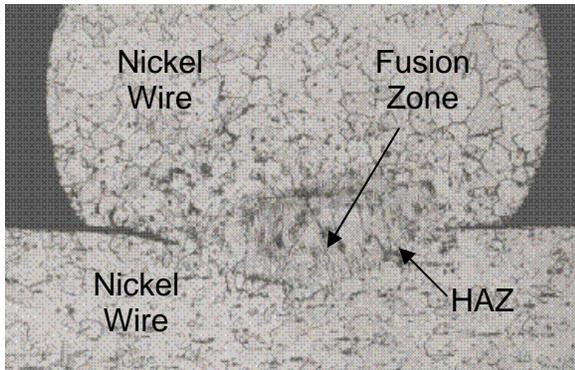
Fusion bond created by resistance welding technology.
